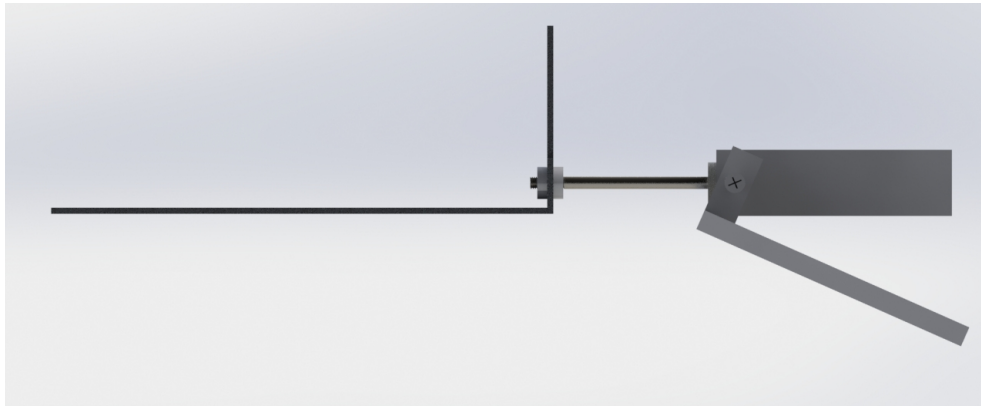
Base showing that the cylinder is fixed inside a block, but is able to rotate because of the hinge joint as can be seen in this side-view.
